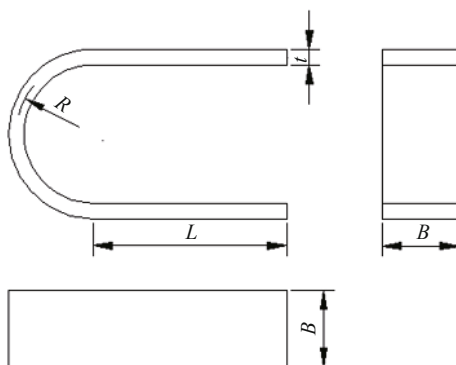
Configuration and dimensions of a U-shaped steel bumper
